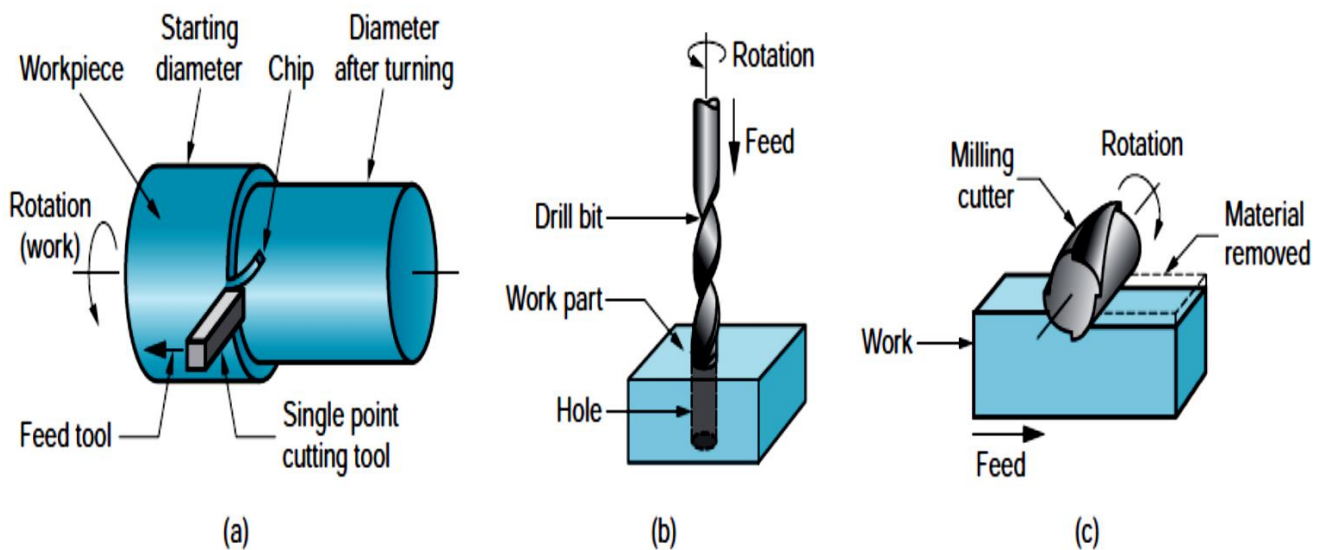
Machining Operations; (a) turning, (b) drilling, (c) milling
